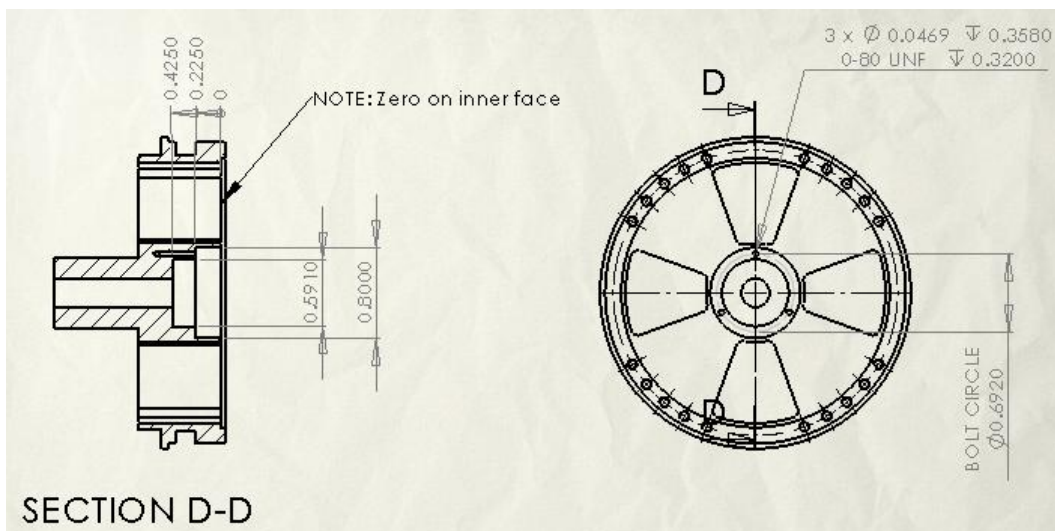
Bottom view of top piston half including section view with gland dimensions
